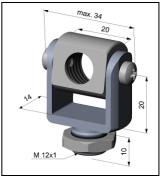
Mounting fork with M12x1 thread, adjustable in 2 axes [TM-MG-CS]
